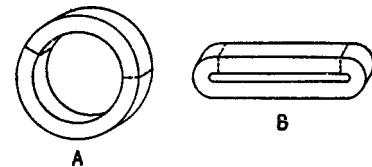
Location of Transverse Tension Test Specimen in Ring Cut from Tubular Steel Products
